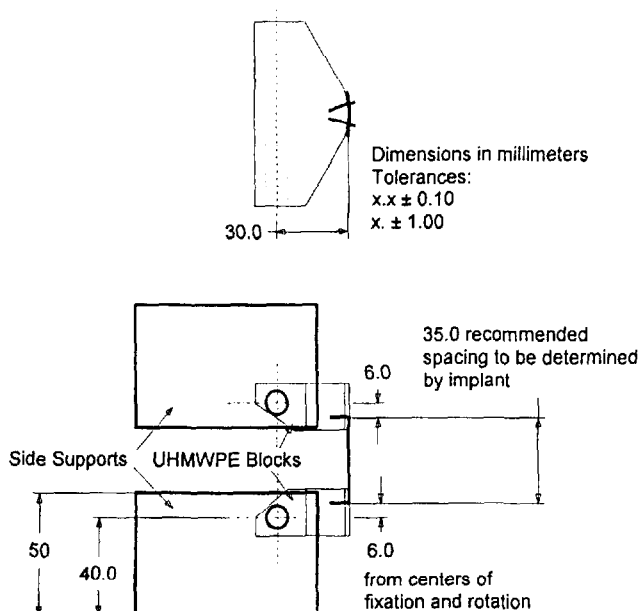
Cervical Unilateral Construct Test Setup For Screws or Bolts
